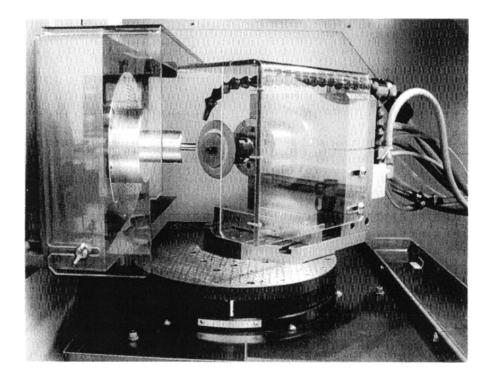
Close up photograph of the grinding spindle and wheel as used in the machine of Fig. 10.7 to grind precision surfaces on brittle materials. (Courtesy of Moore Nanotechnology Systems, Keene, NH.)
